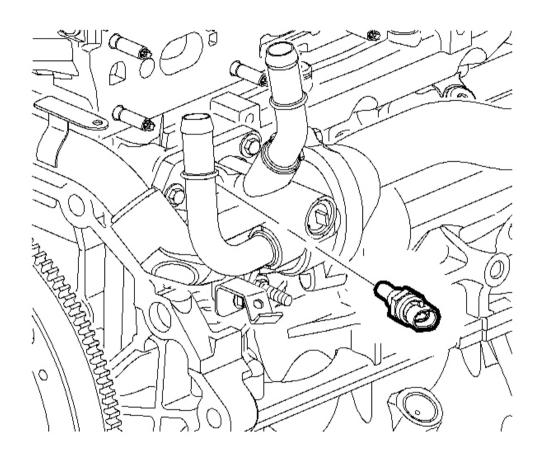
View Of Engine Coolant Temperature Sensor Courtesy of GENERAL MOTORS CORP.
